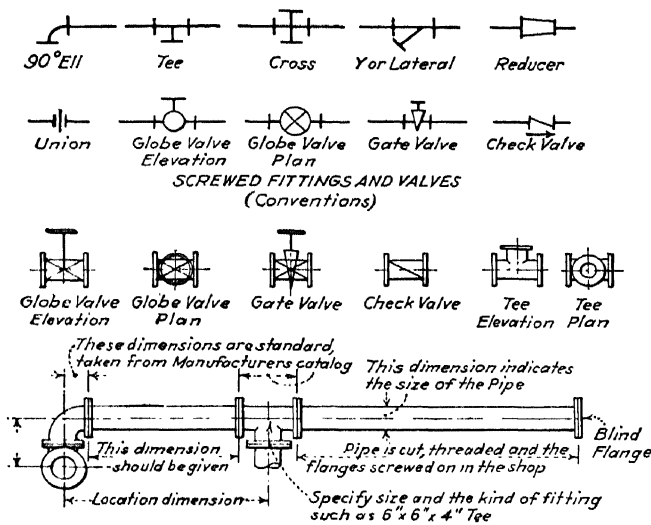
Screwed and flanged fittings and valves. (Conventions.)
